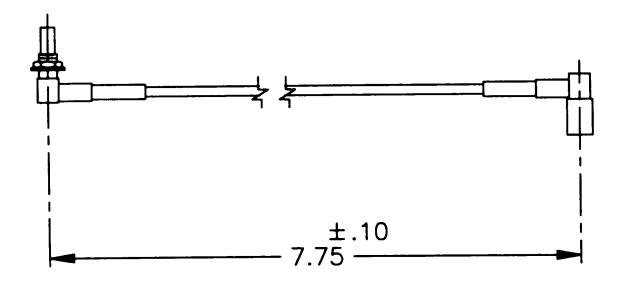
W2 RF Cable Assembly (PA-Receiver/Exciter) Component Location Diagram (10372-1053 Rev. A)
